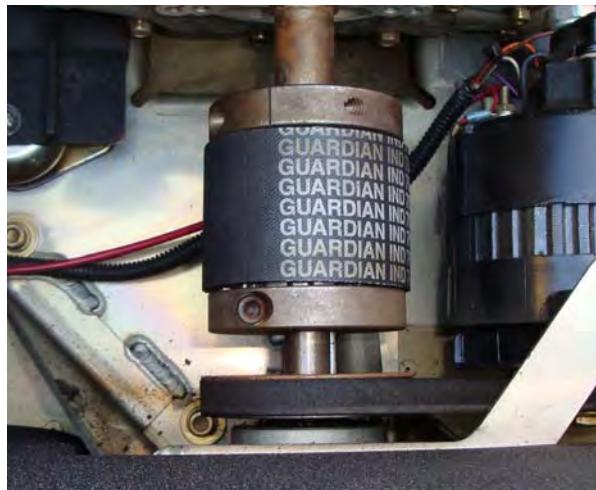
Checking for Movement of the Rubber Coupling After Installation.
